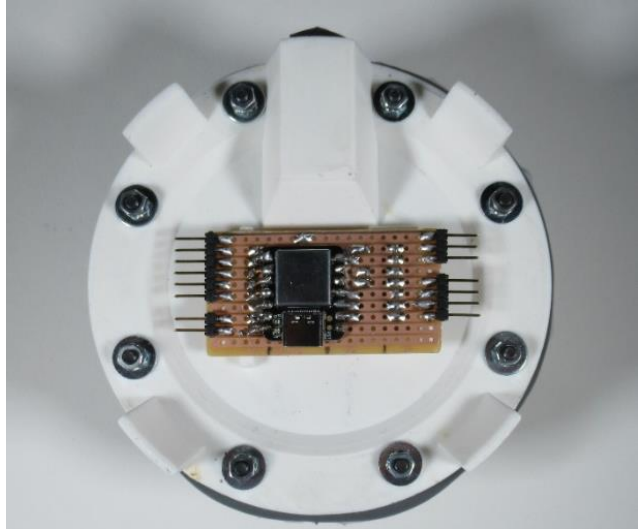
Seeeduino Xiao soldered to the bottom of the module with easy access to the important pins
